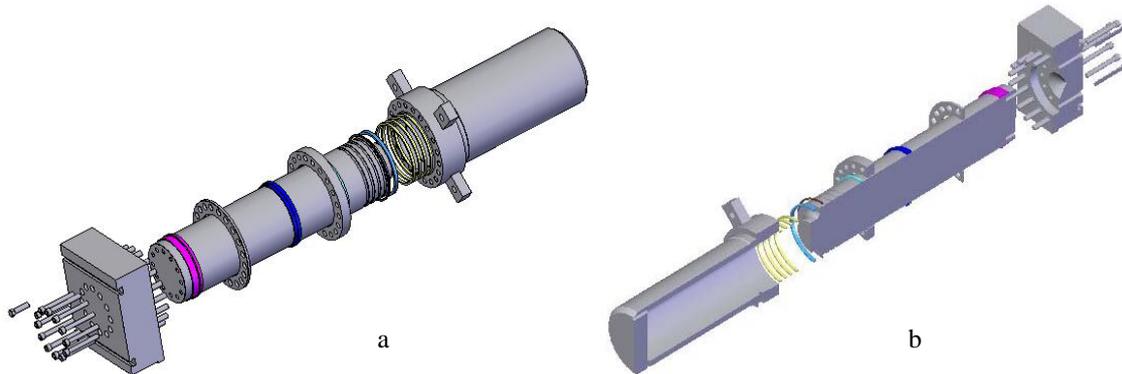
3D exploded representation of: a) the hydraulic element force from horizontal Hydraulic Press – 2 MN; b) a longitudinal section in the hydraulic element force from horizontal Hydraulic Press – 2 MN.
